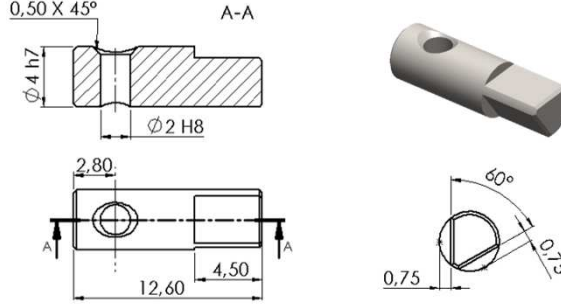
Technical drawing of the driven shaft and its CAD model resulting from the design procedure presented in this section.
